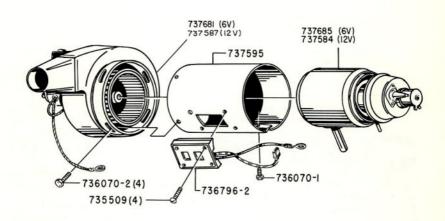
HEATER ASSEMBLY 737593, 737686 USED ON 8349 A & B
